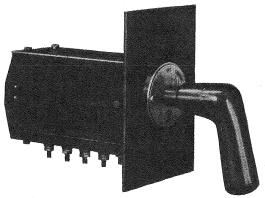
CONTROL SWITCH ASSEMBLY WITH SIDE PANELS REMOVED
